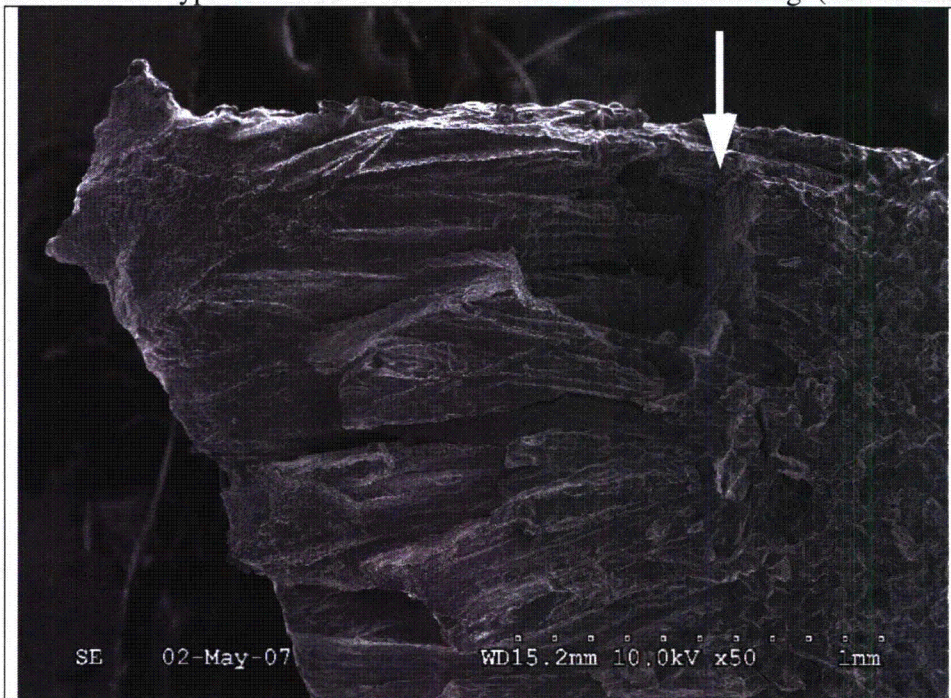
A SEM view of the Sample A1 crack surface near the upper end of the weld. The arrow points to a planar defect in the weld. There are several cracks within the weld that are connected to the defect. The ductile region toward the upper left corner of the sample was broken open in the lab. (50x Magnification)
